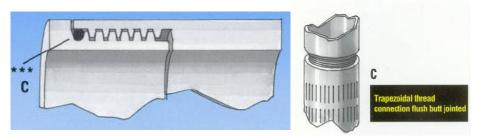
Type of connection between tubes and type of thread. * Rubber seal is optional
